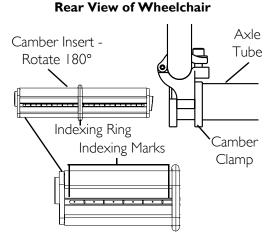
Adjusting Rear Wheel Camber - A4 Camber System
